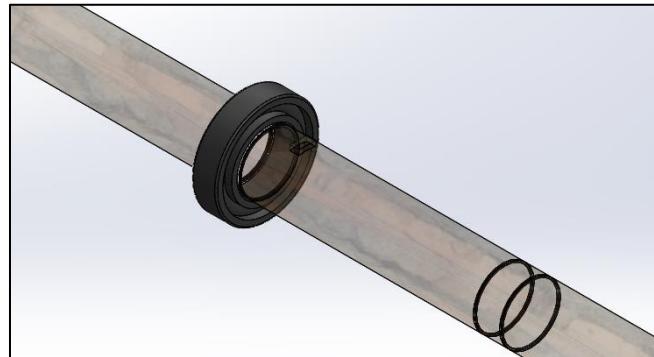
A Ball Bearing Placed Over the Pulley Driving Shaft
